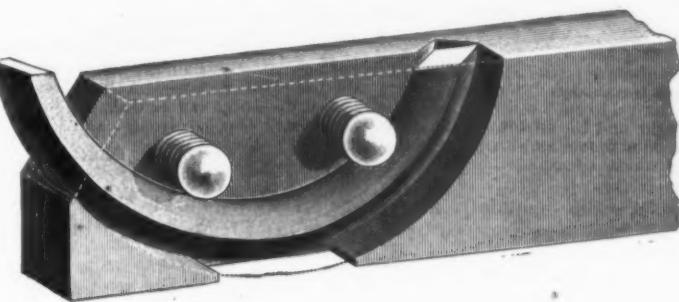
Sliding Rest or Holder, with Cap Removed.
